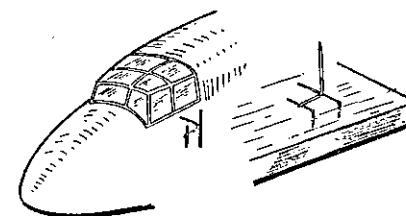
Homing aerial showing method of soldering on scrap-wood block.
